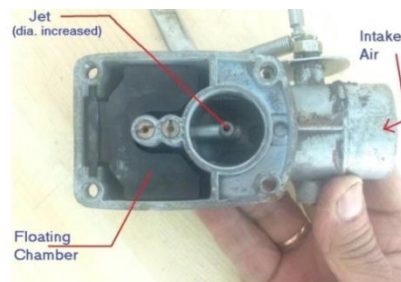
Inside view of actual carburetor used (after drilling in jet)
